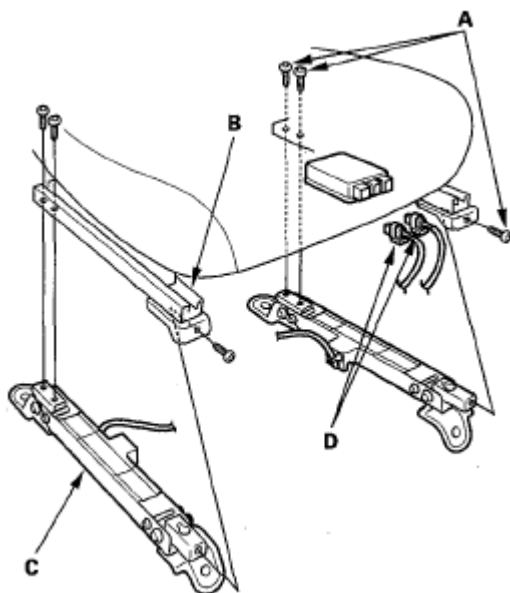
Identifying Tamper-Resistant Torx Bolts, Seat Track And Front Passenger's Weight Sensors
